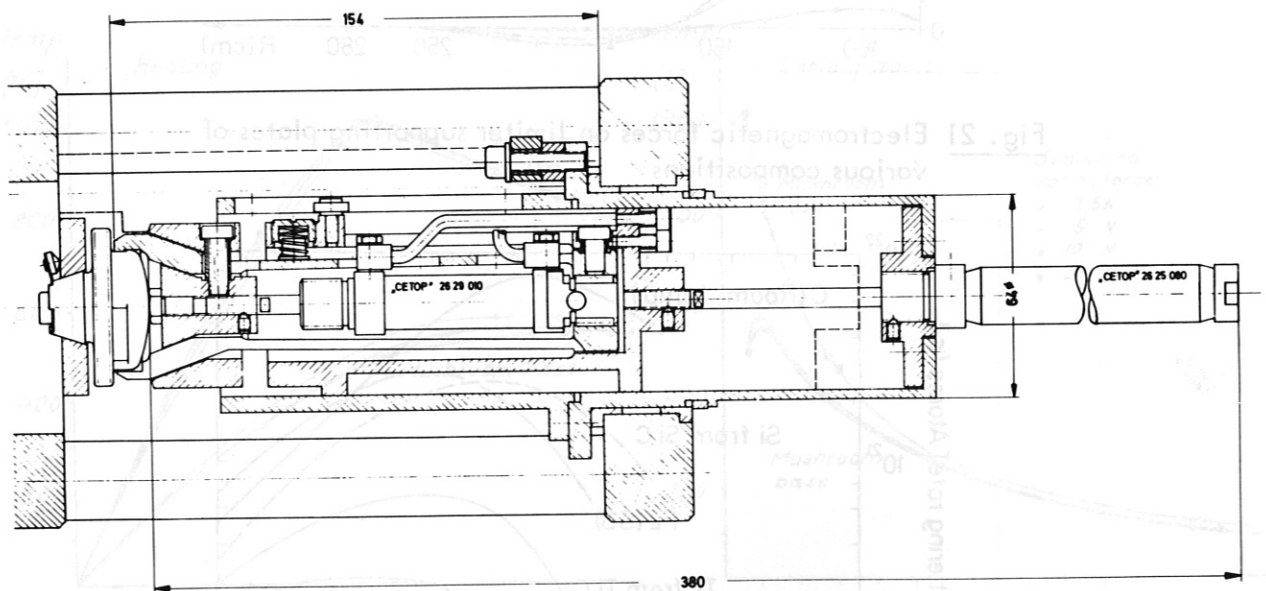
Prototype of the automatic device for mounting of the limiter elements
